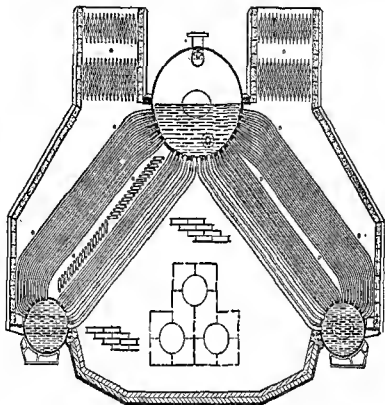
Combustion Engineering type V3M three-drum bent-tube boiler with superheater and economizers.
